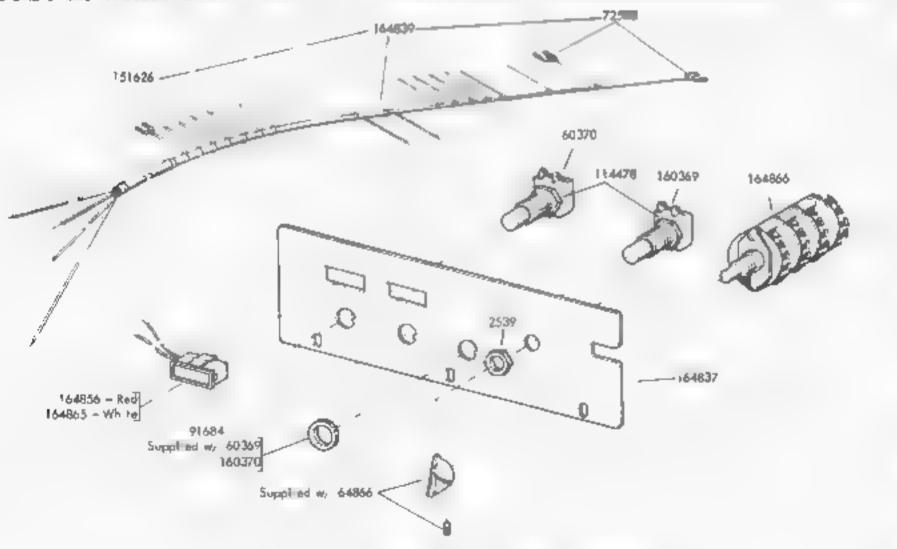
164838 CONTROL PANEL ASSEMBLY
